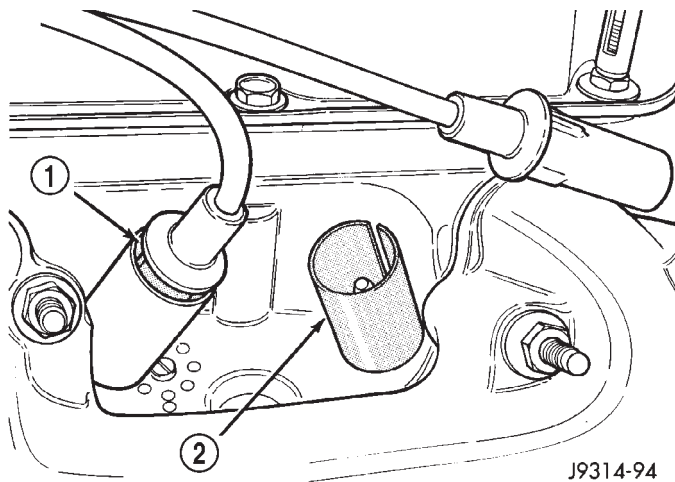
Heat Shields—3.9/5.2/5.9L Engines
